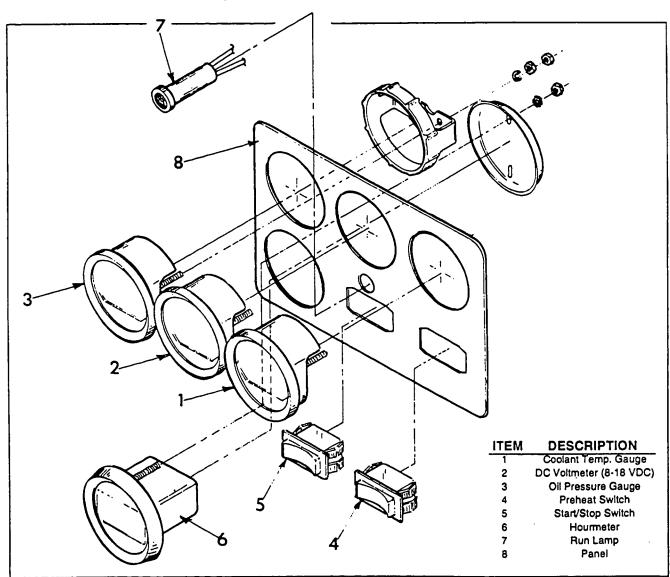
Exploded View of Model 9061 Remote Gauge Panel
